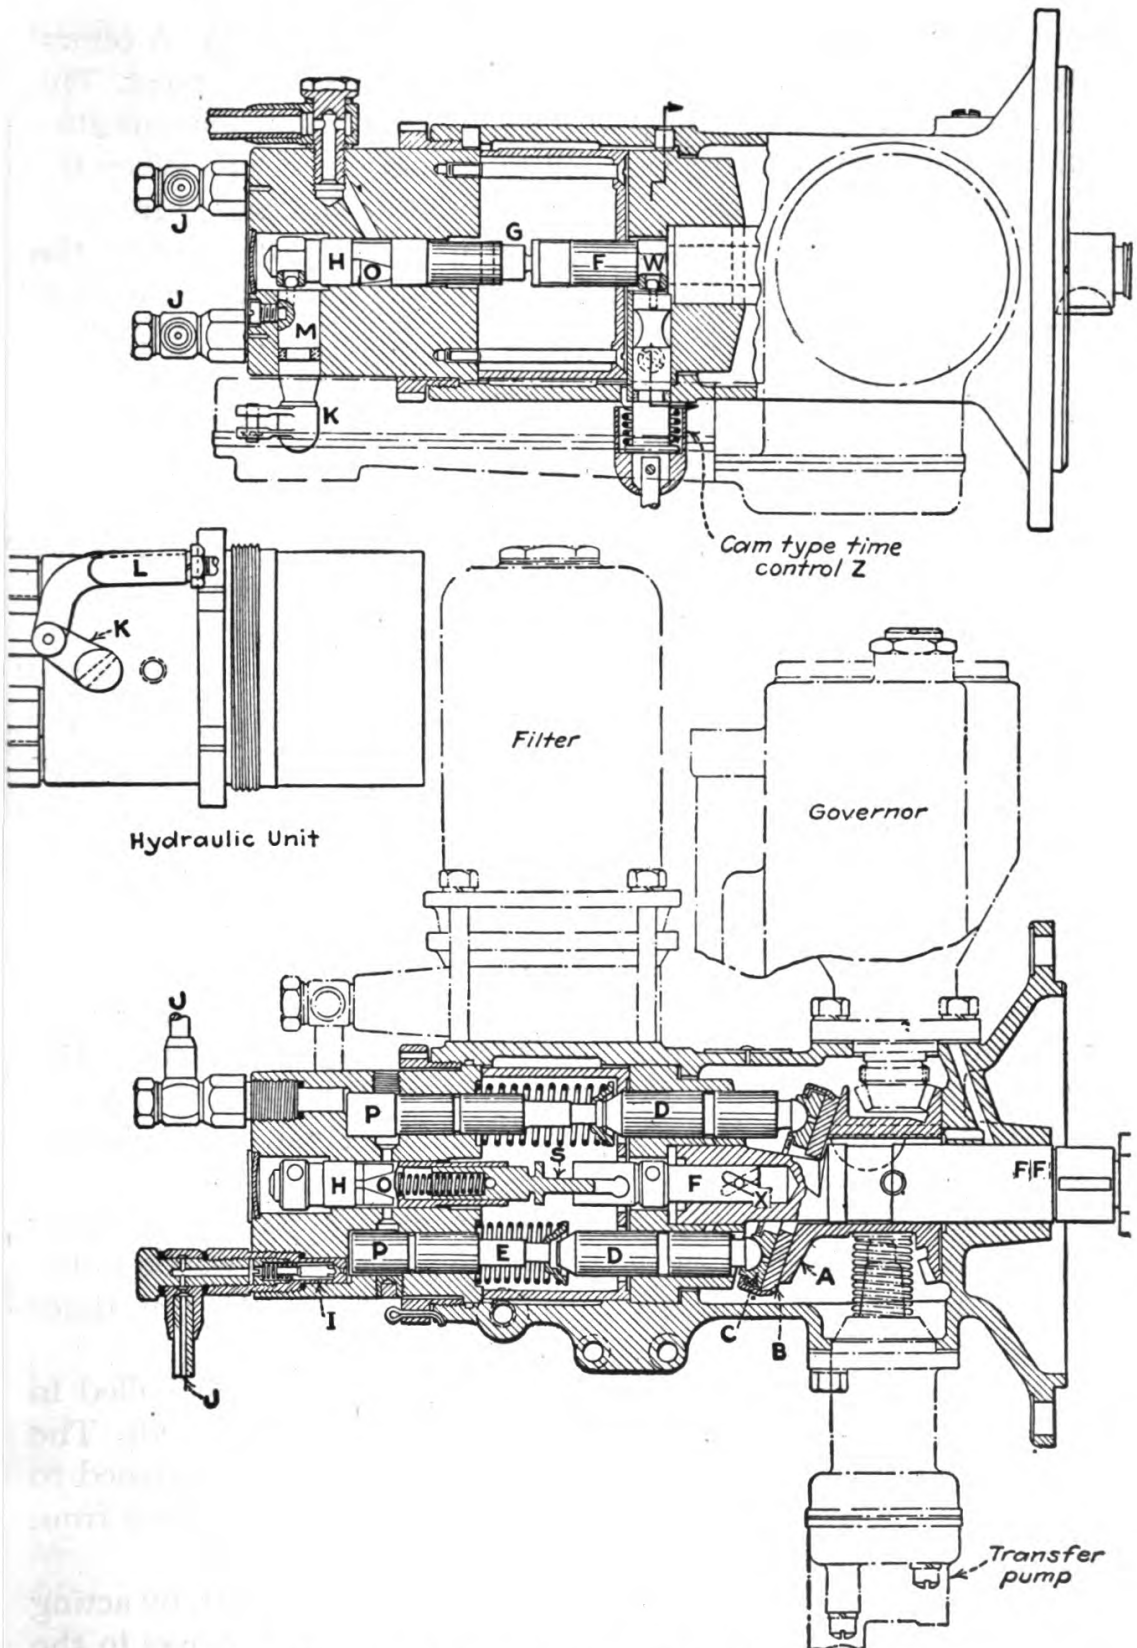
View of Rotating Suction Valve of Ex-Cell-O Fuel Pump
